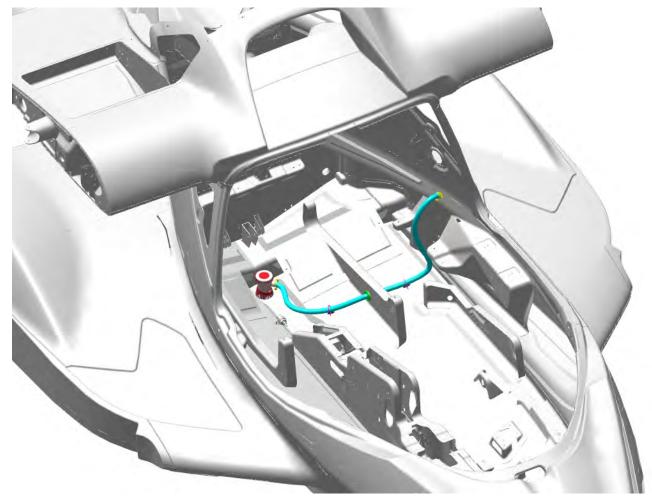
BILGE PUMP INSTALLATION AND OUTLET ROUTING
